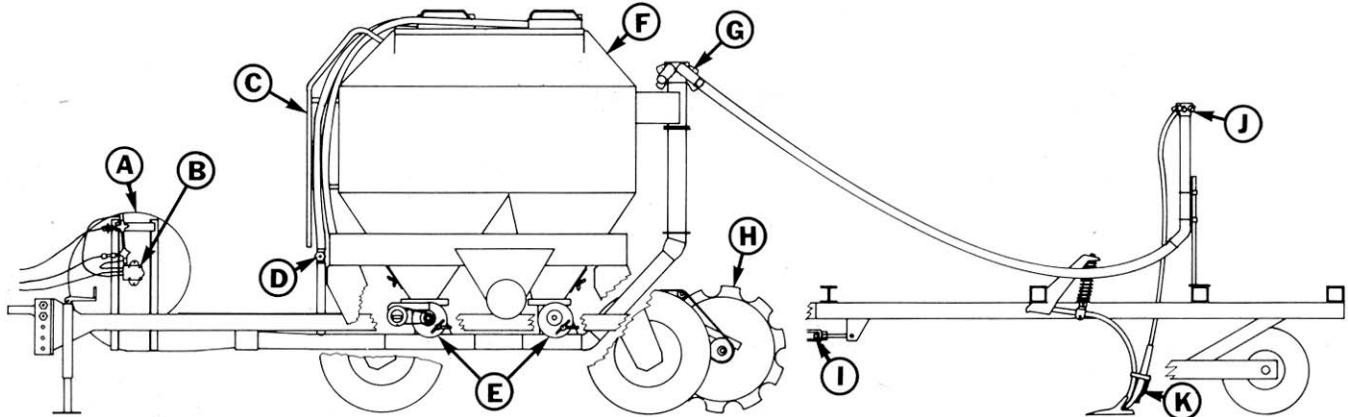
Prasco 75-55 Pneumatic Applicator: (A) Fan, (B) Fan Drive, (C) Ladder, (D) Tank Pressure Valves, (E) Metering System, (F) Tanks, (G) Primary Header, (H) Meter Drive Wheel, (I) Hitch Adjustment Turnbuckle, (J) Secondary Header, (K) Seed Boot.
